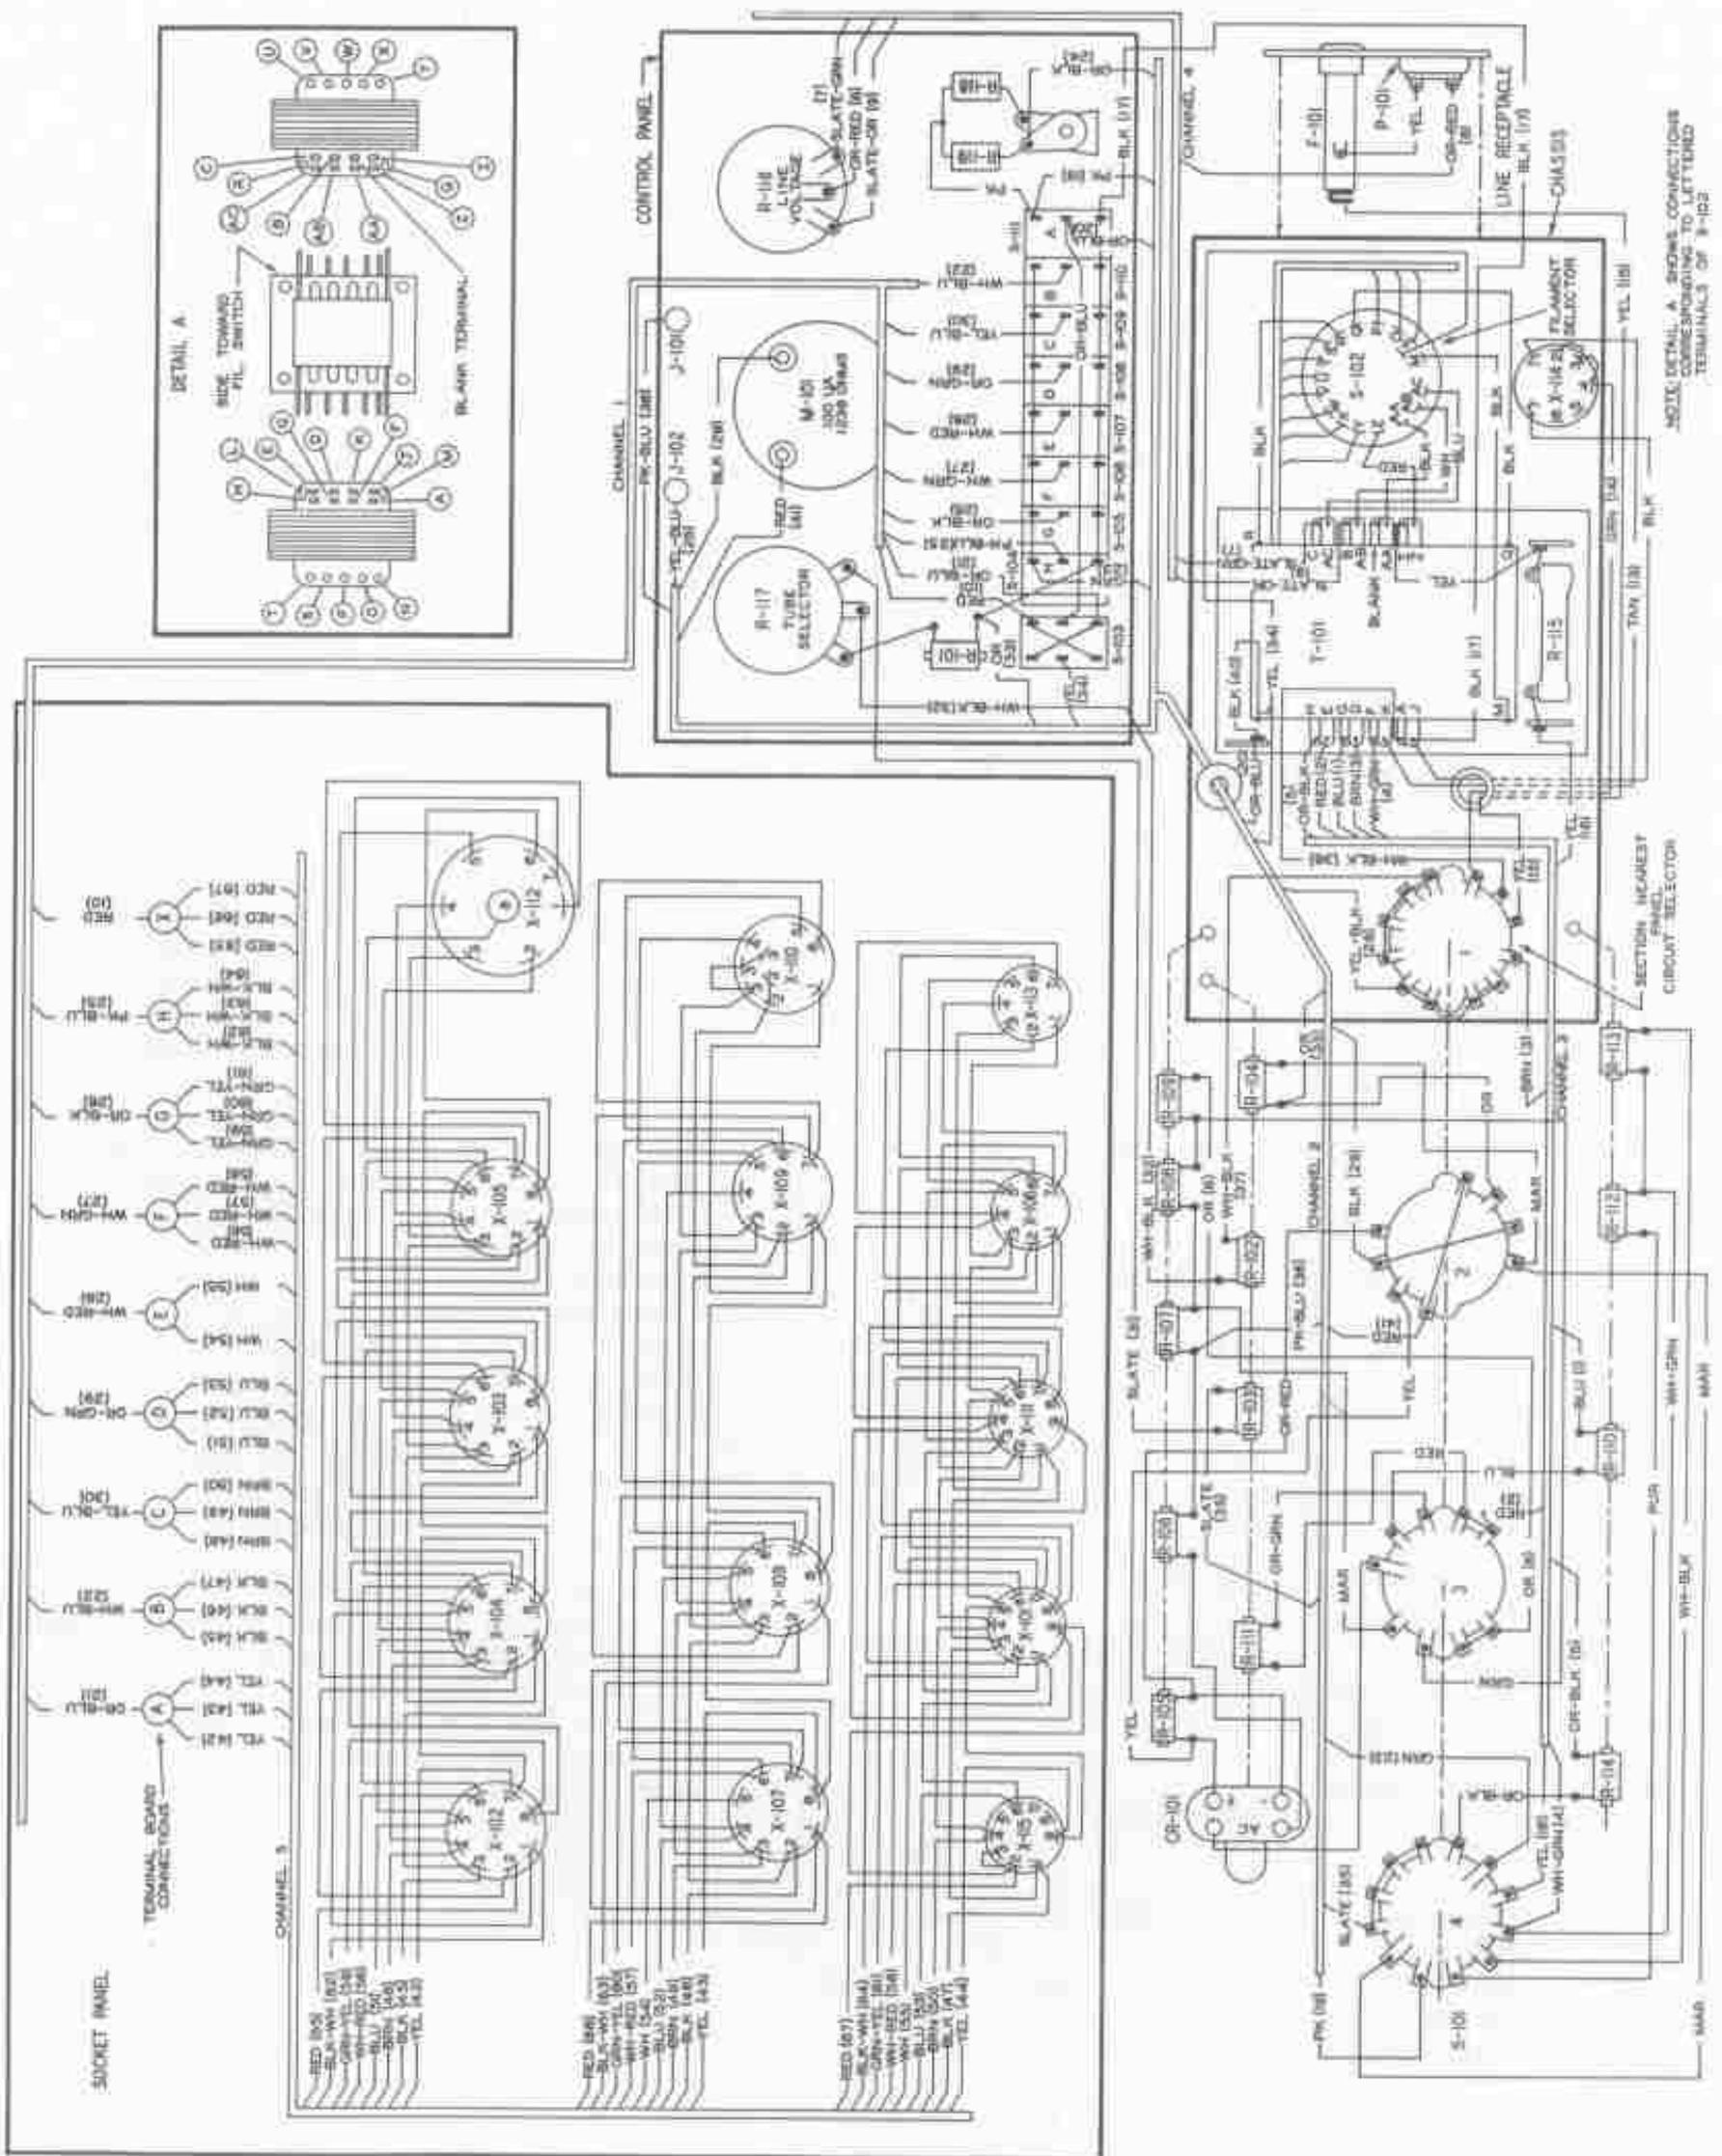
Wiring Diagram of Tube Tester TV-4A/U
